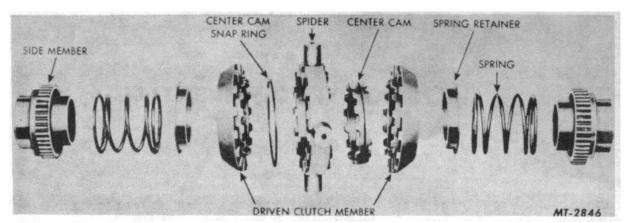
Internal Spring Design Differential Locking Unit (Exploded View)
